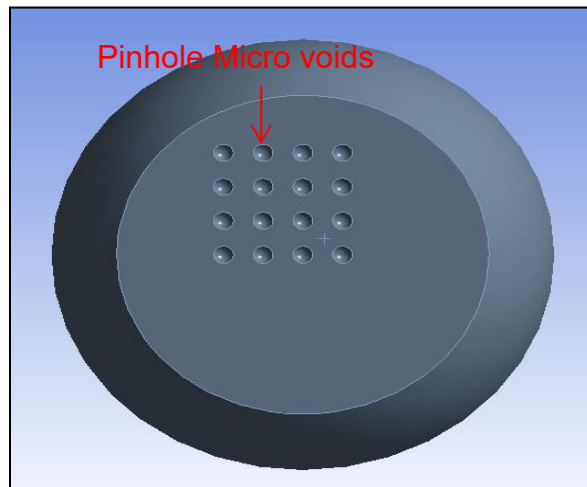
5 Case III Pinhole micro voids at the top of the solder ball where it connects with critical solder layer
